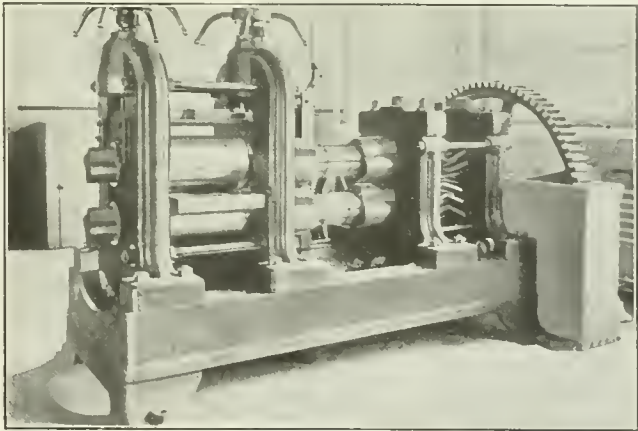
"Breaking-down" Rolls used to reduce the Metal for Wire-making
